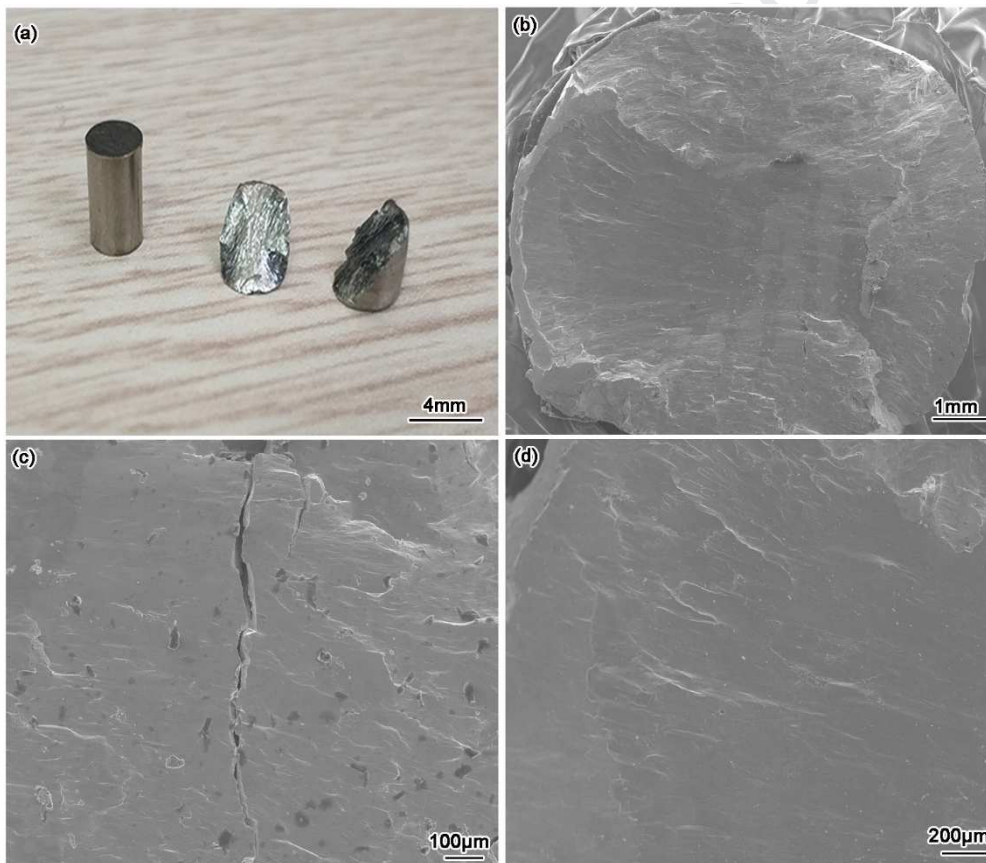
(a) The morphology of SLM-1000 before and after compression testing, SEM image for (b) whole fracture surface, (c) crack morphology and (d) smooth area.
